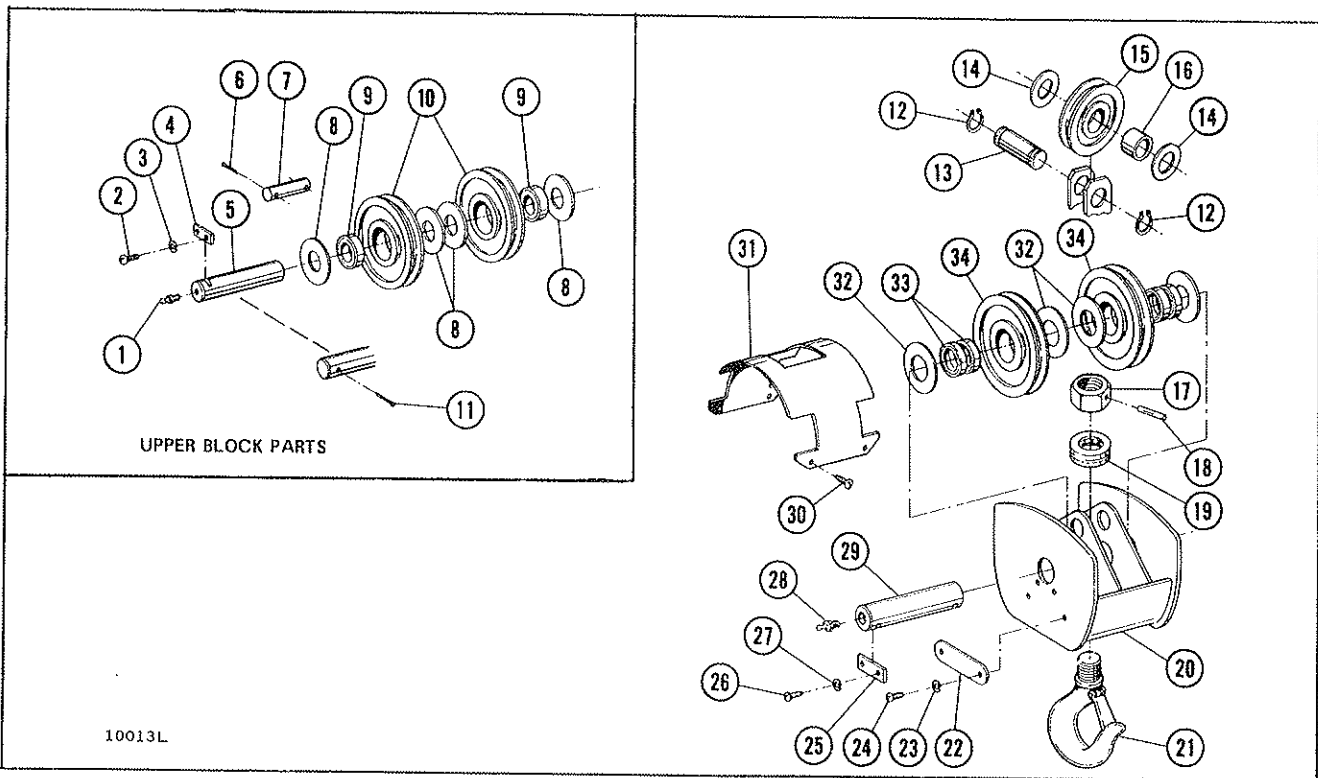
Upper and Lower Block Parts Including Hoist Rope.
